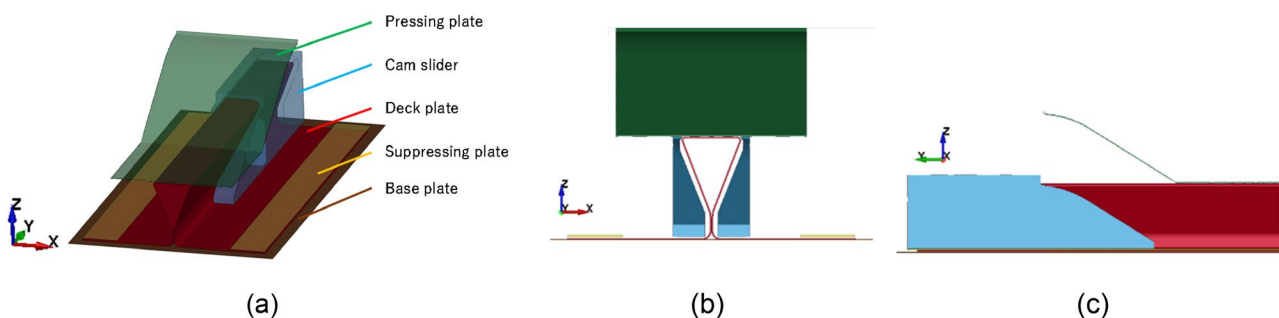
| Model for end pressing analysis: (a) Entire view, (b) front view, (c) side view.
